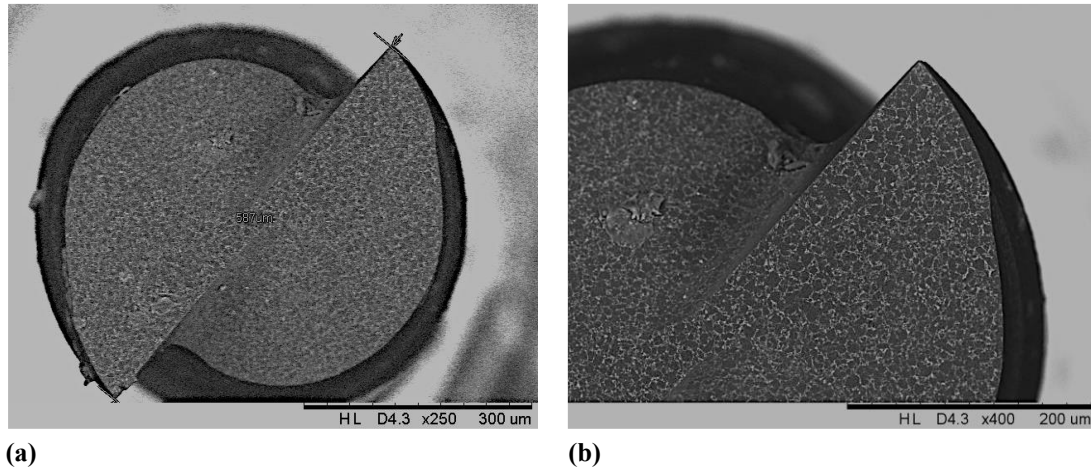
12 Cutting tool; (a) corss section; (b) cutting edge
